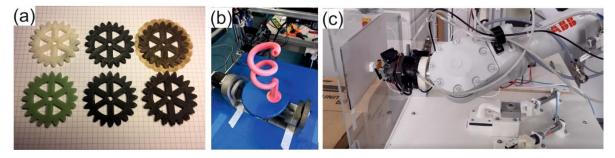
(a) Parts printed with bio-based nano-fillers and carbon fibres, (b) part produced using the 5-axis material extrusion printer, and (c) part being produced by the 6-axis material extrusion printer.
